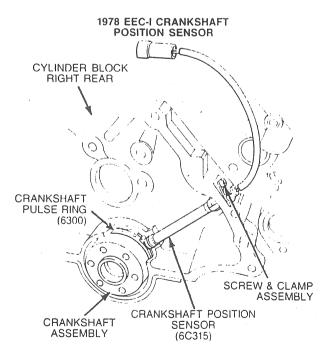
CP sensor design and location. (Courtesy of Ford Motor Co.)
